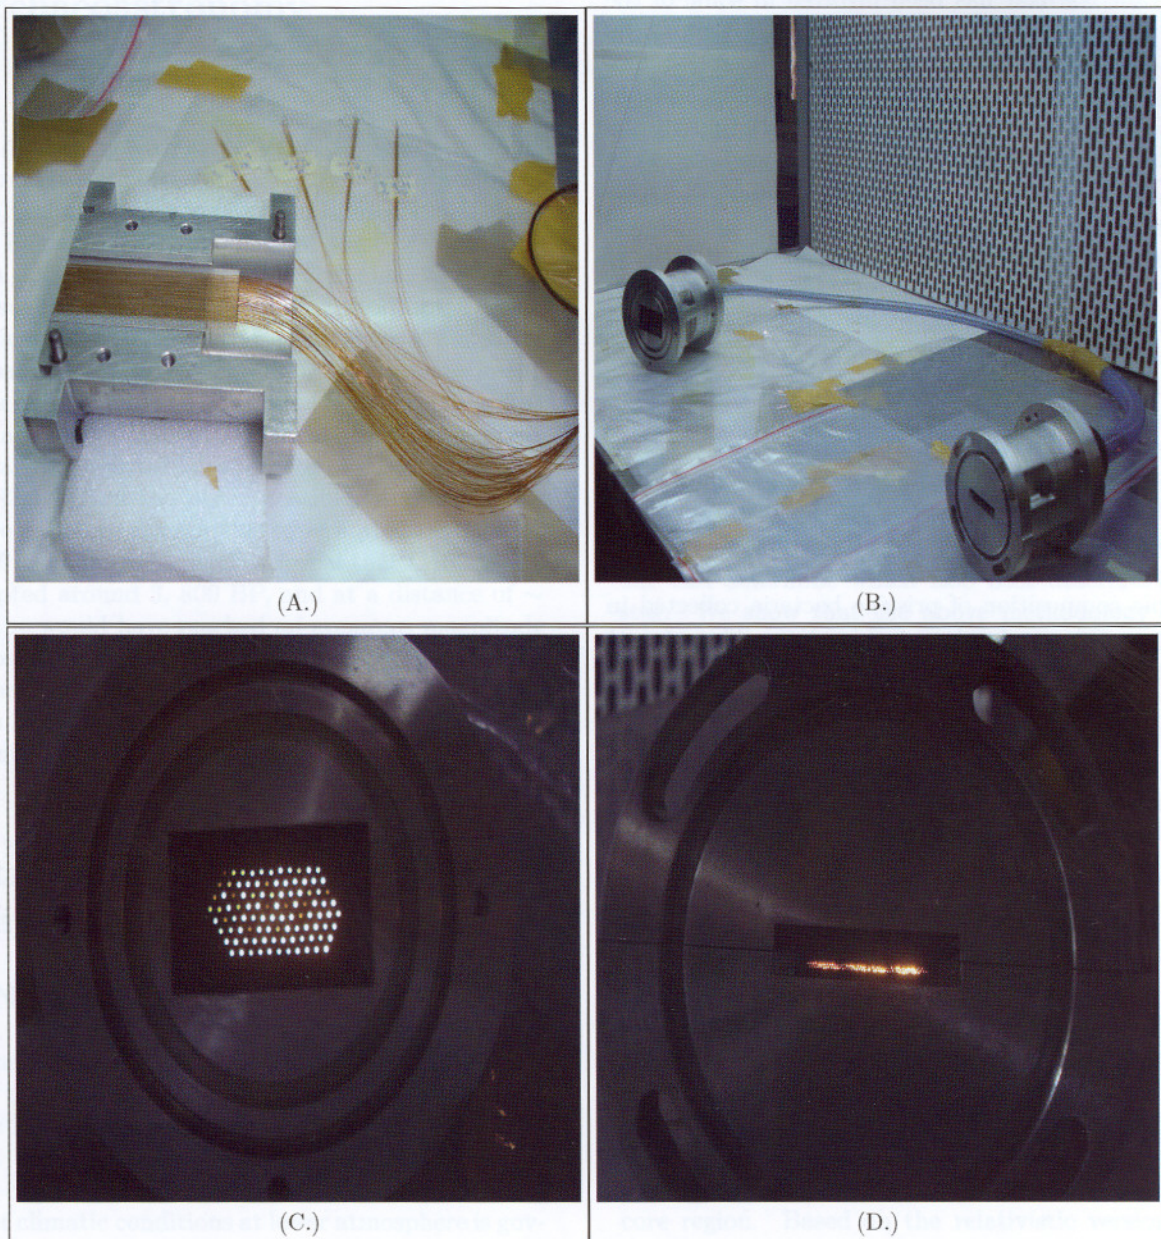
Figures showing various stages in the fabrication of Fibre Units Assembly. (A) Fibre Slit Unit in making, (B) Fabricated Fibre Unit Assembly of the IFU, (C) Input End of the assembly : Fibre Head Mount Unit, (D) Output End : Fibre Slit Unit.
